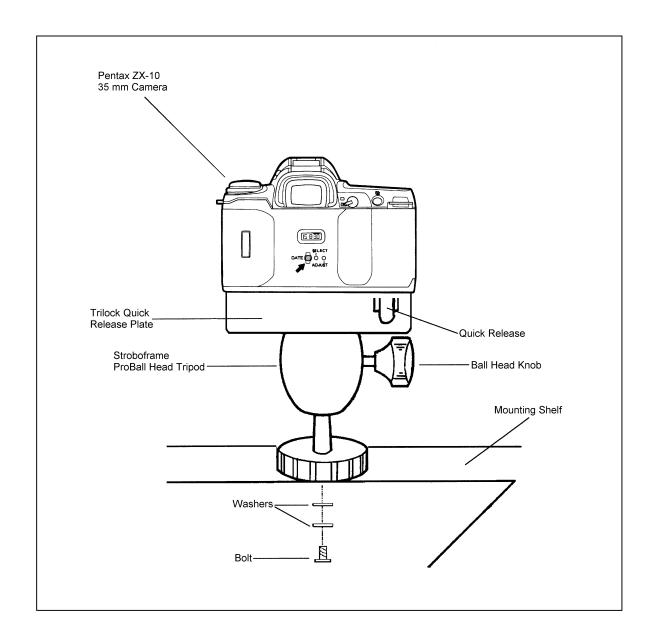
Automatic 35 mm Camera System Tripod Assembly.
